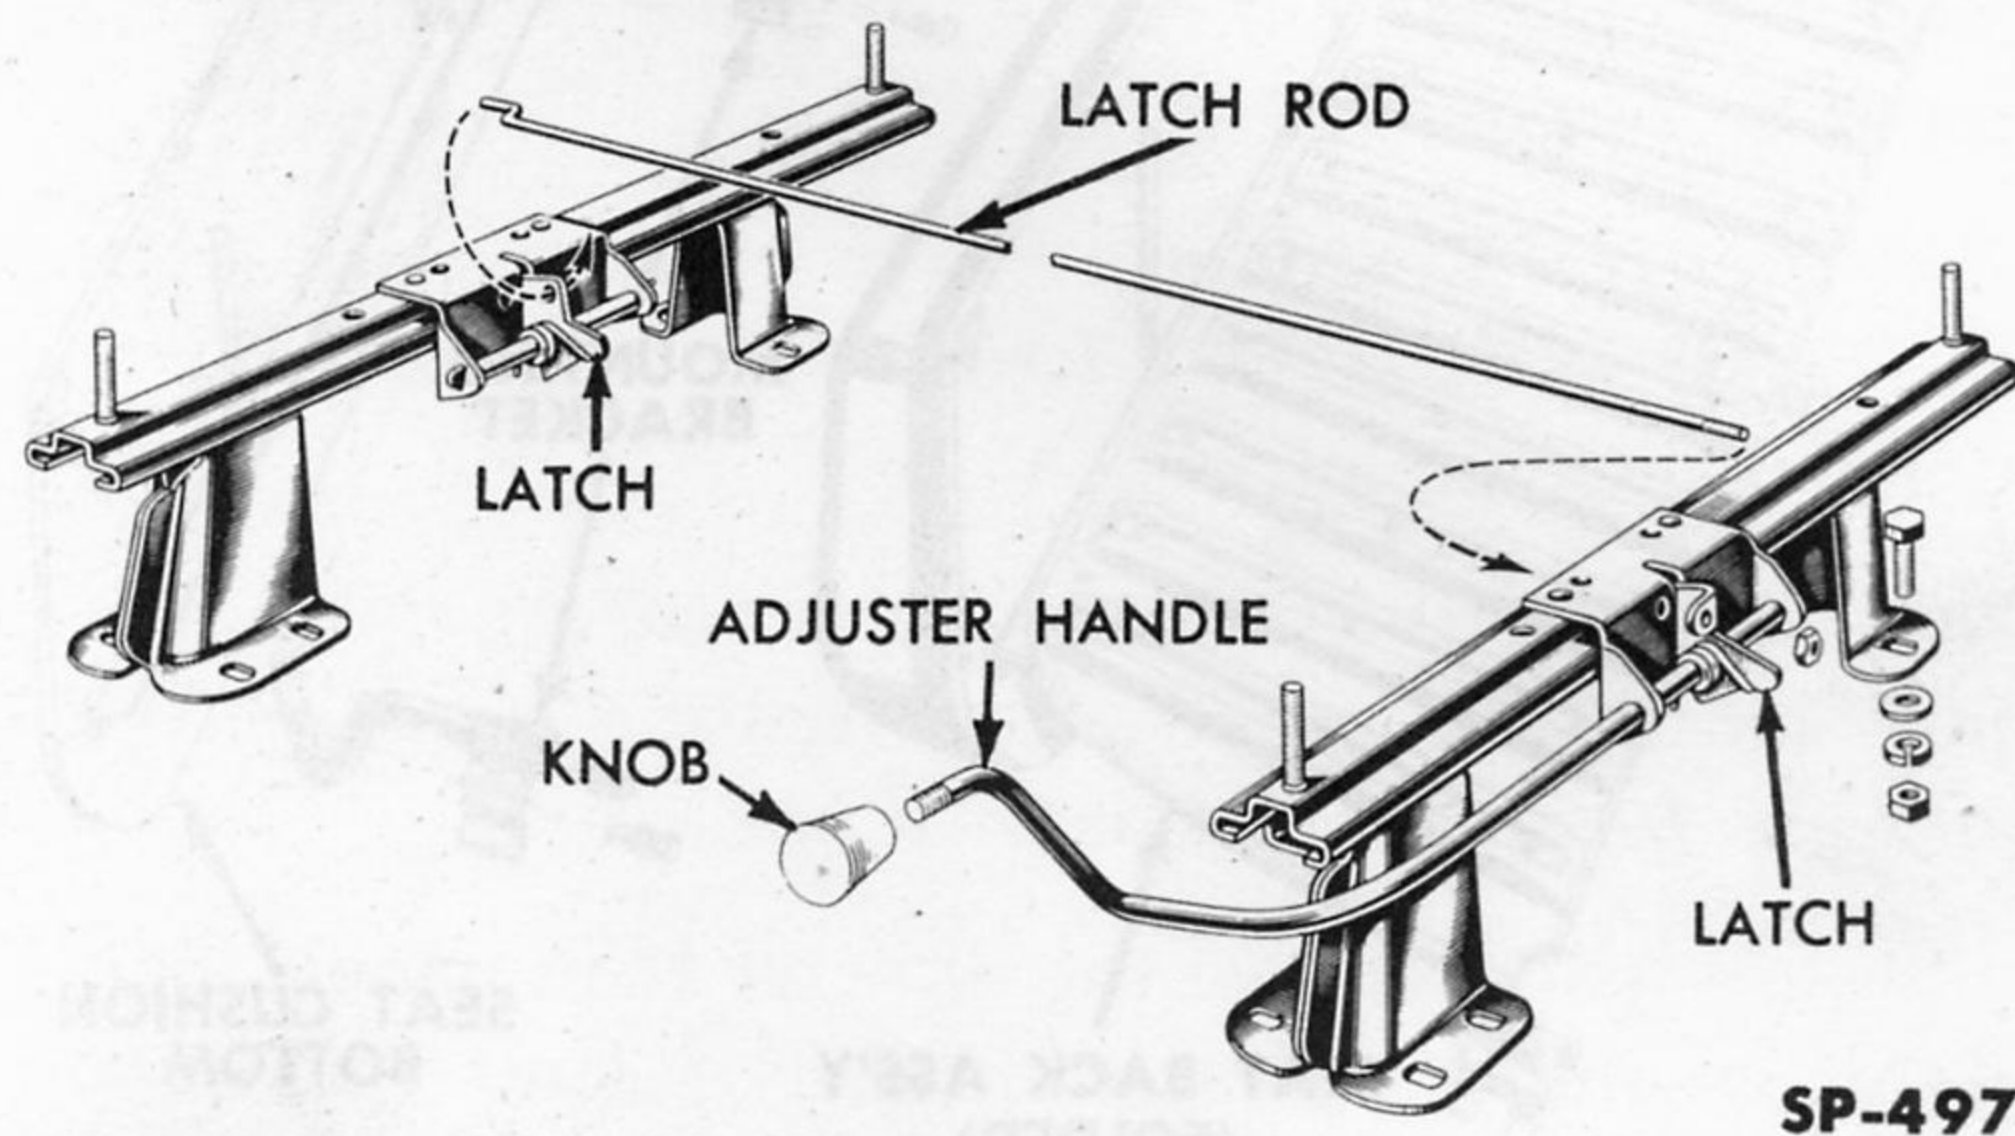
Front Seat Adjusting Mechanism—Frazer
